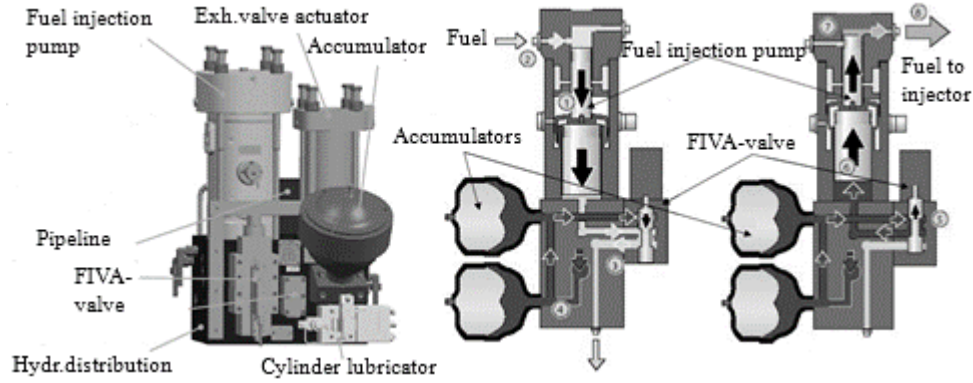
MAN B&W 6S90 ME-C hydraulic control unit arrangement
